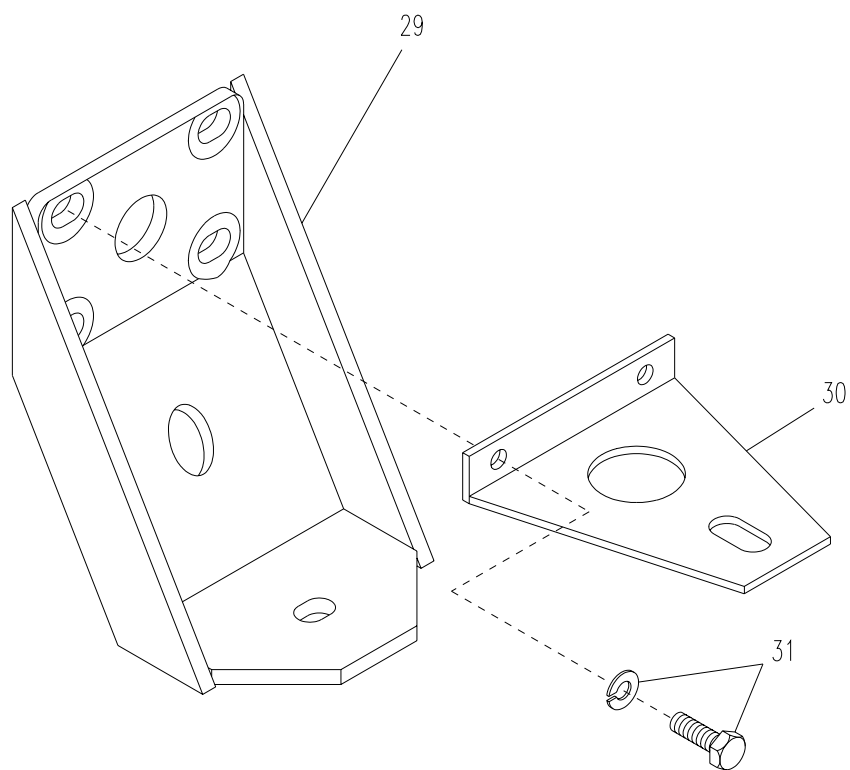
Diesel Engine (Sheet 10 of 11)
